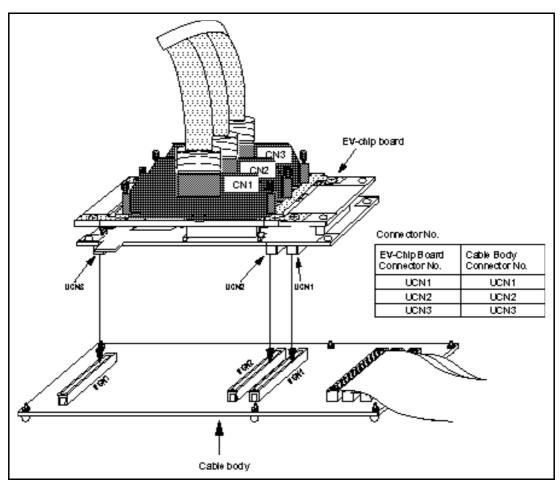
Connecting User System Interface Cable to EV-Chip Board
